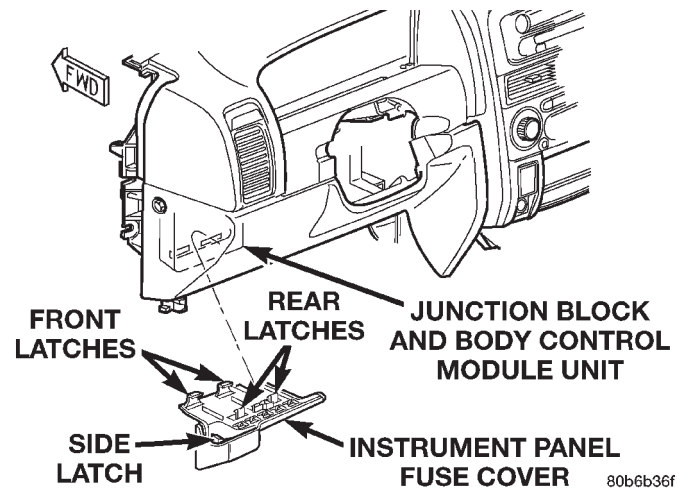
Instrument Panel Fuse Cover Remove/Install
